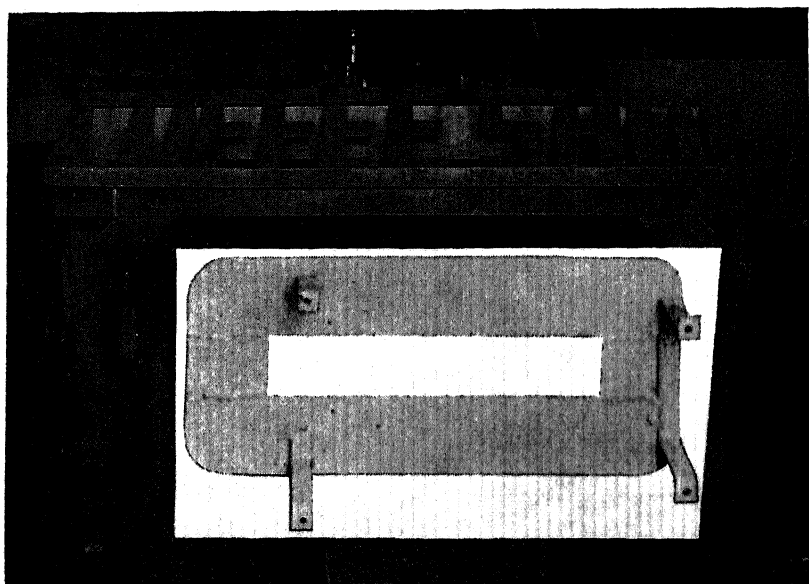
Letters sheared from 10-gauge strip, 2 inches wide, and fabricated by arc welding. For use on a neon sign with arc welded framework. Inset shows construction of letter and method of attachment.
